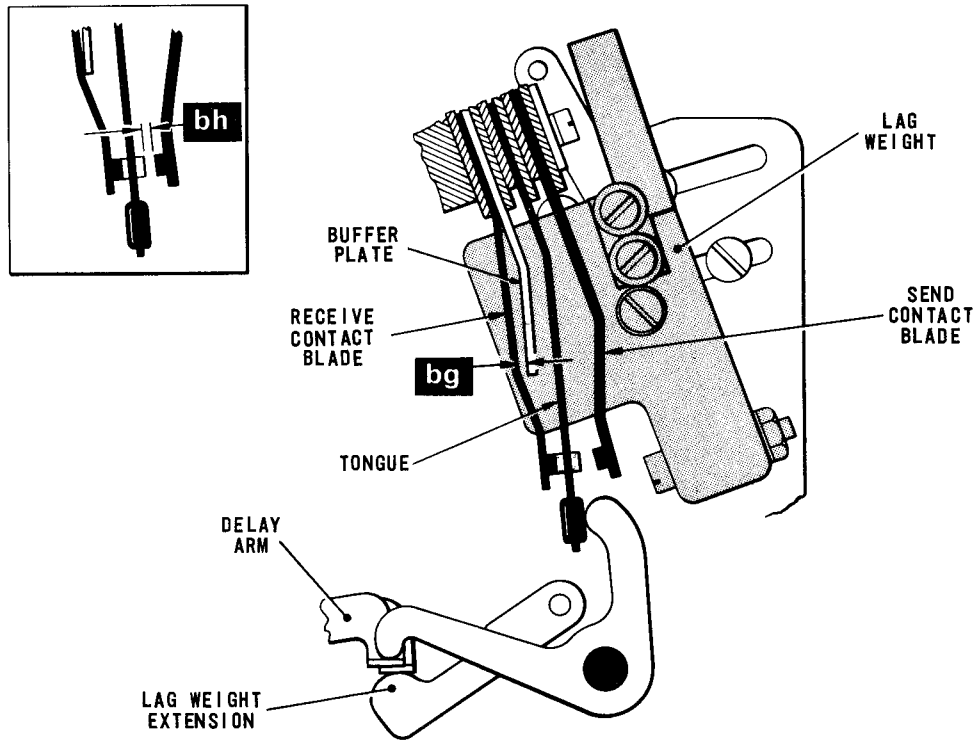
SEND-RECEIVE SWITCH CONTACTS
